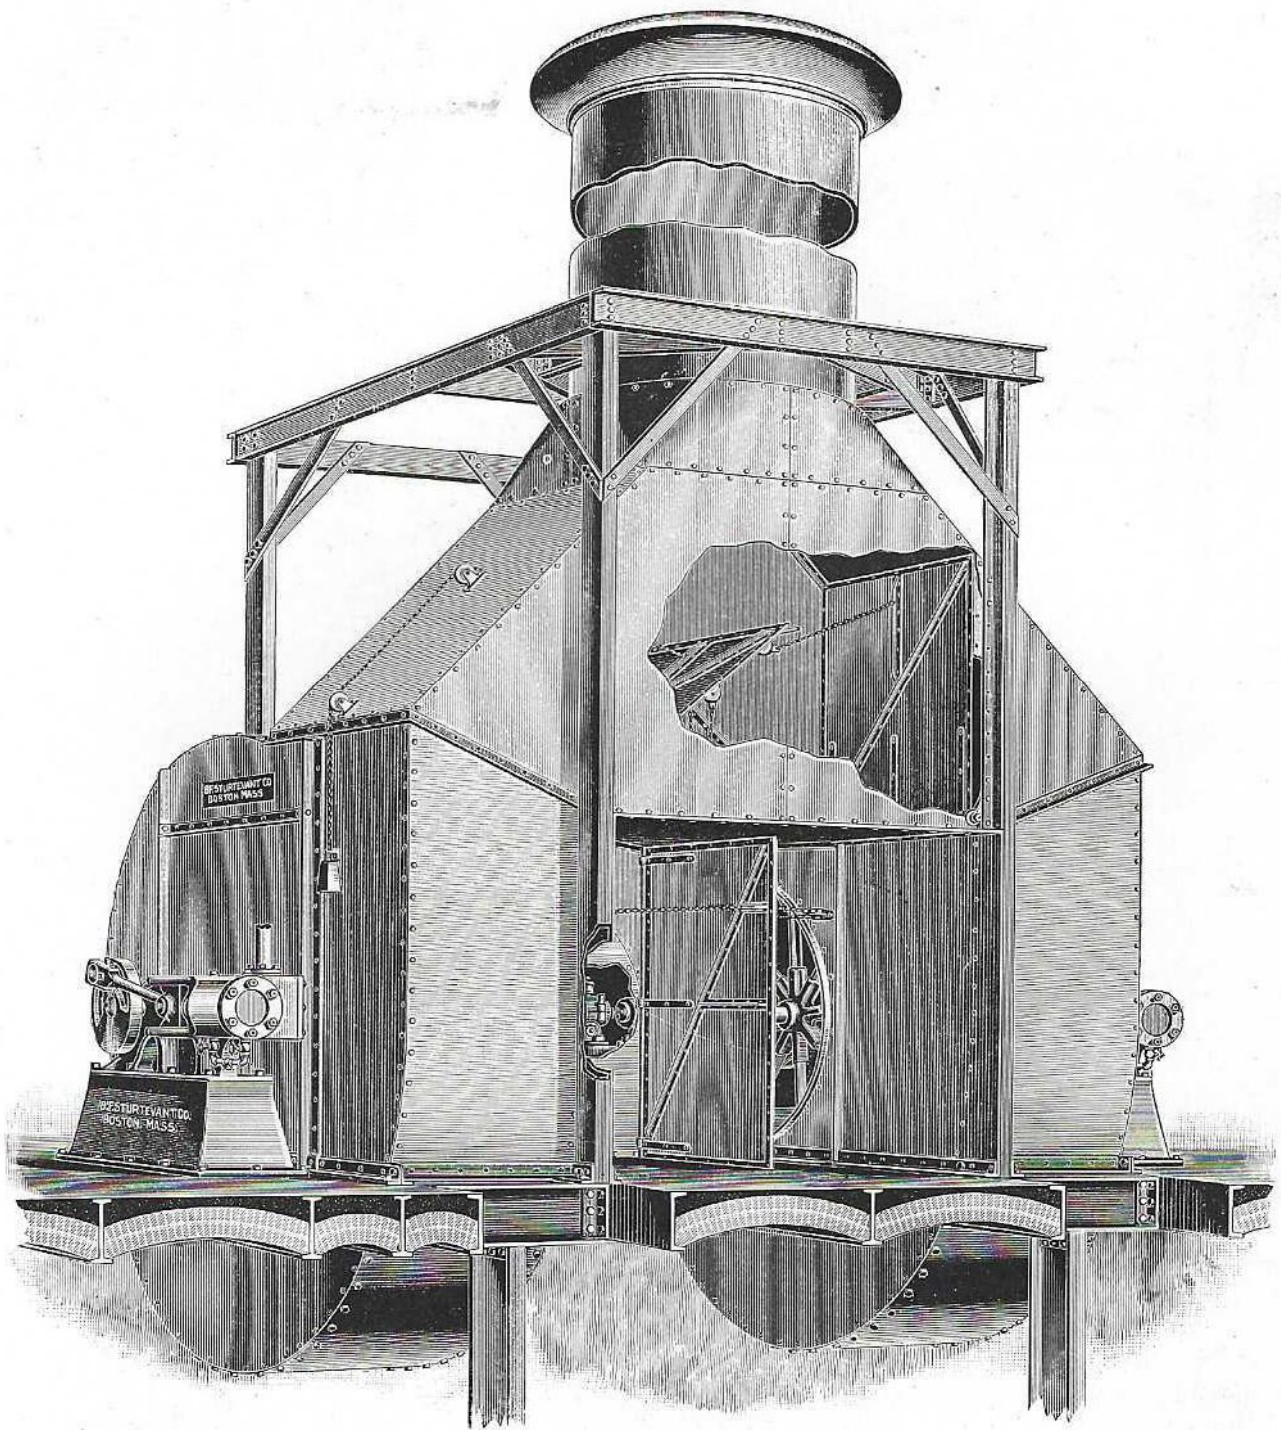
SPECIAL DUPLEX STEEL-PLATE STEAM FAN, THREE-QUARTER-HOUSING TYPE, WITH STEEL-PLATE BOTTOM AND HORIZONTAL ENGINES.
